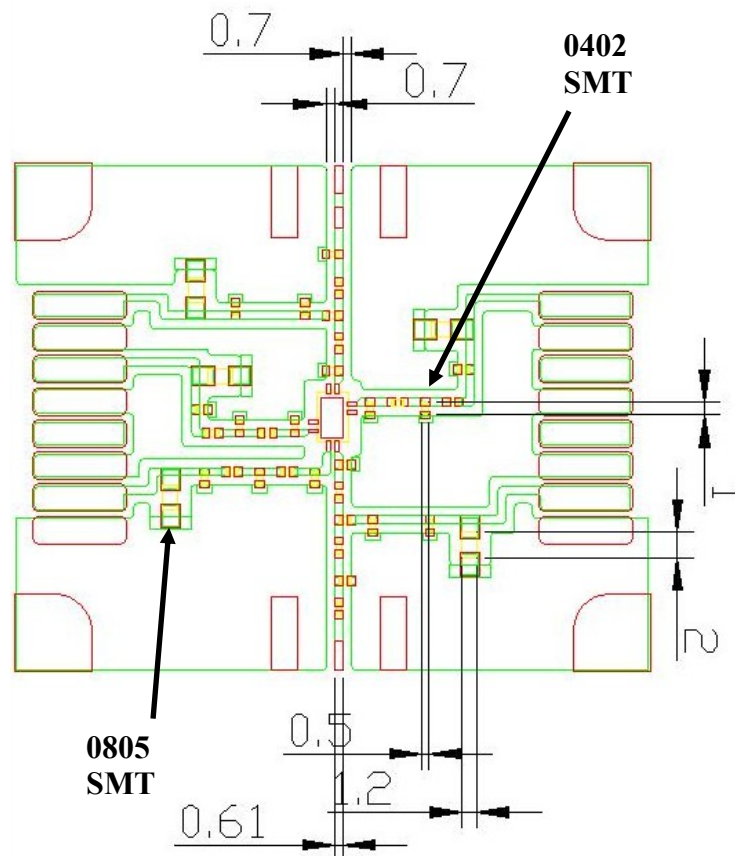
Layout of Testboard\_1 with top metal and top solder mask layers
